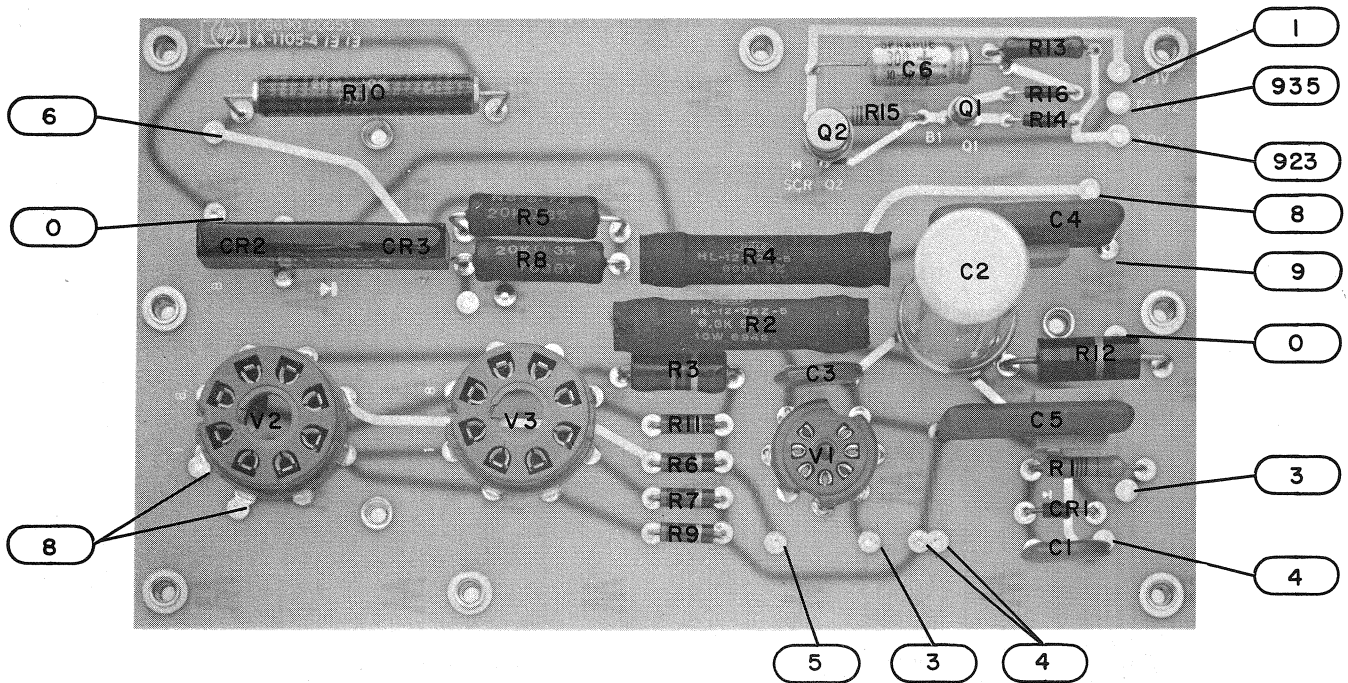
Component Identification, A8 Assembly (Part of Change 11)
